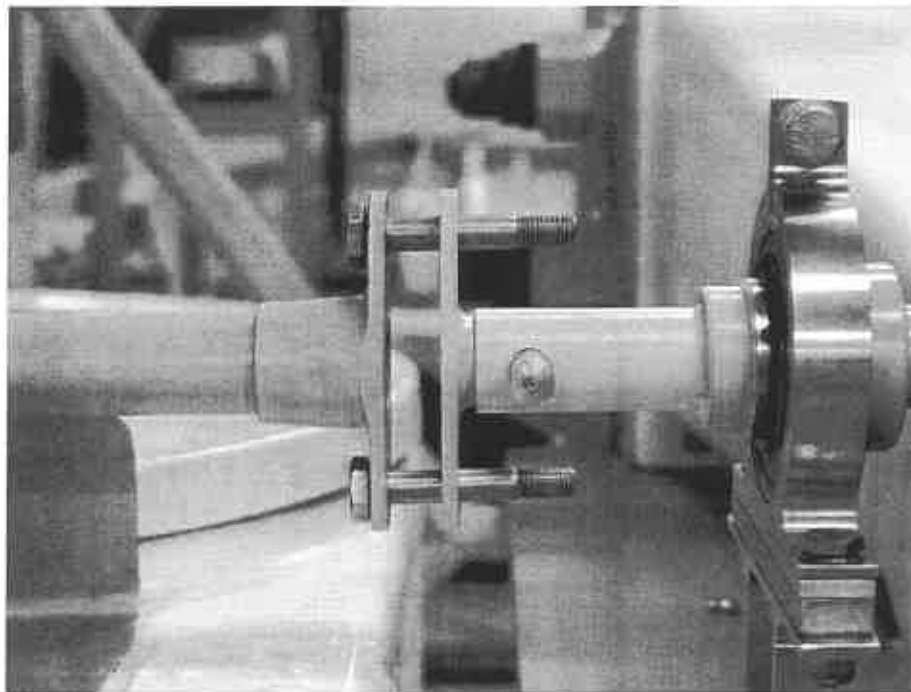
Oil Cooler Blower Shaft Vertically Aligned
